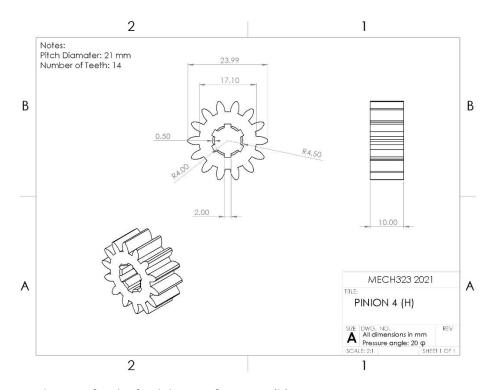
CAD drawing for the final design of Pinion 4 (h).
